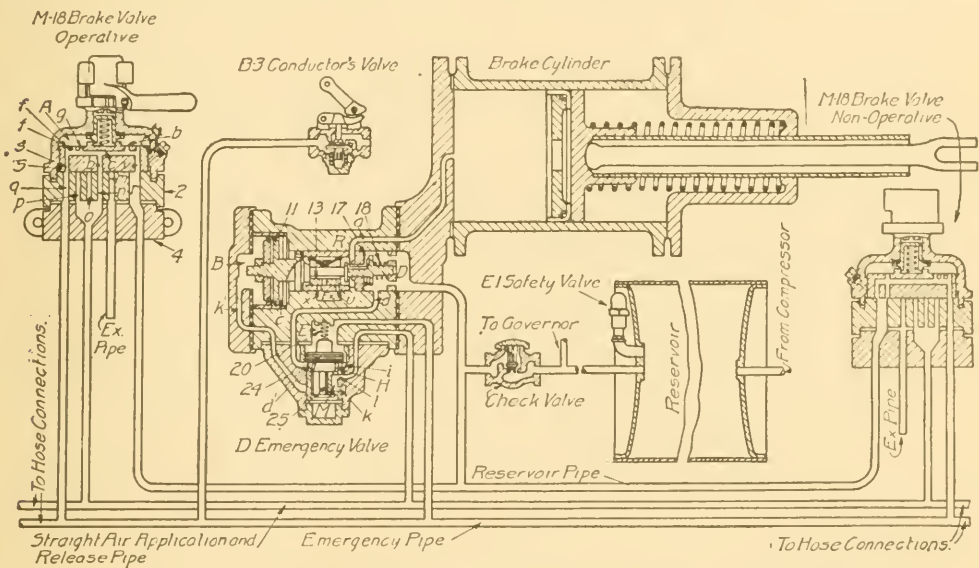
Diagram of One-Car Service, "SME" Equipment with Type "D" Emergency Valve (Westinghouse)
